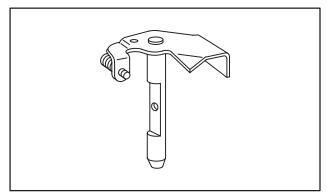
THROTTLE SHAFT AND LEVER, TYPICAL
